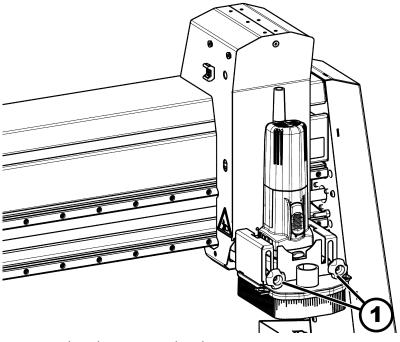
Adjust the extraction hood 1 Height adjustment screw
